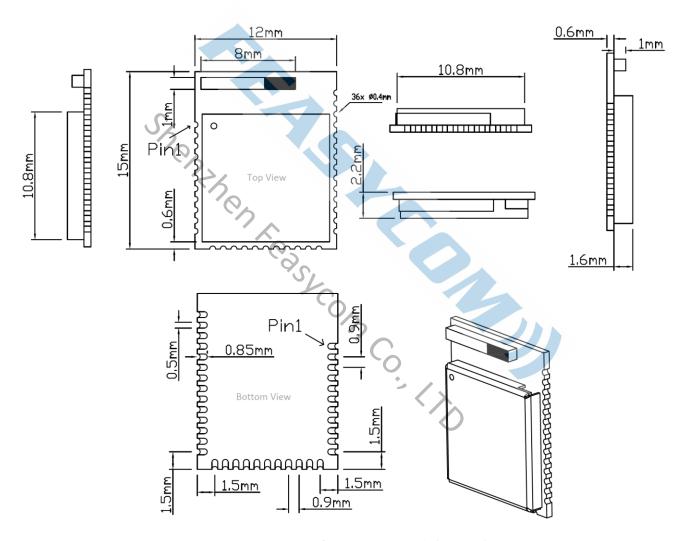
FSC-BT631D footprint Layout Guide (Top View)
